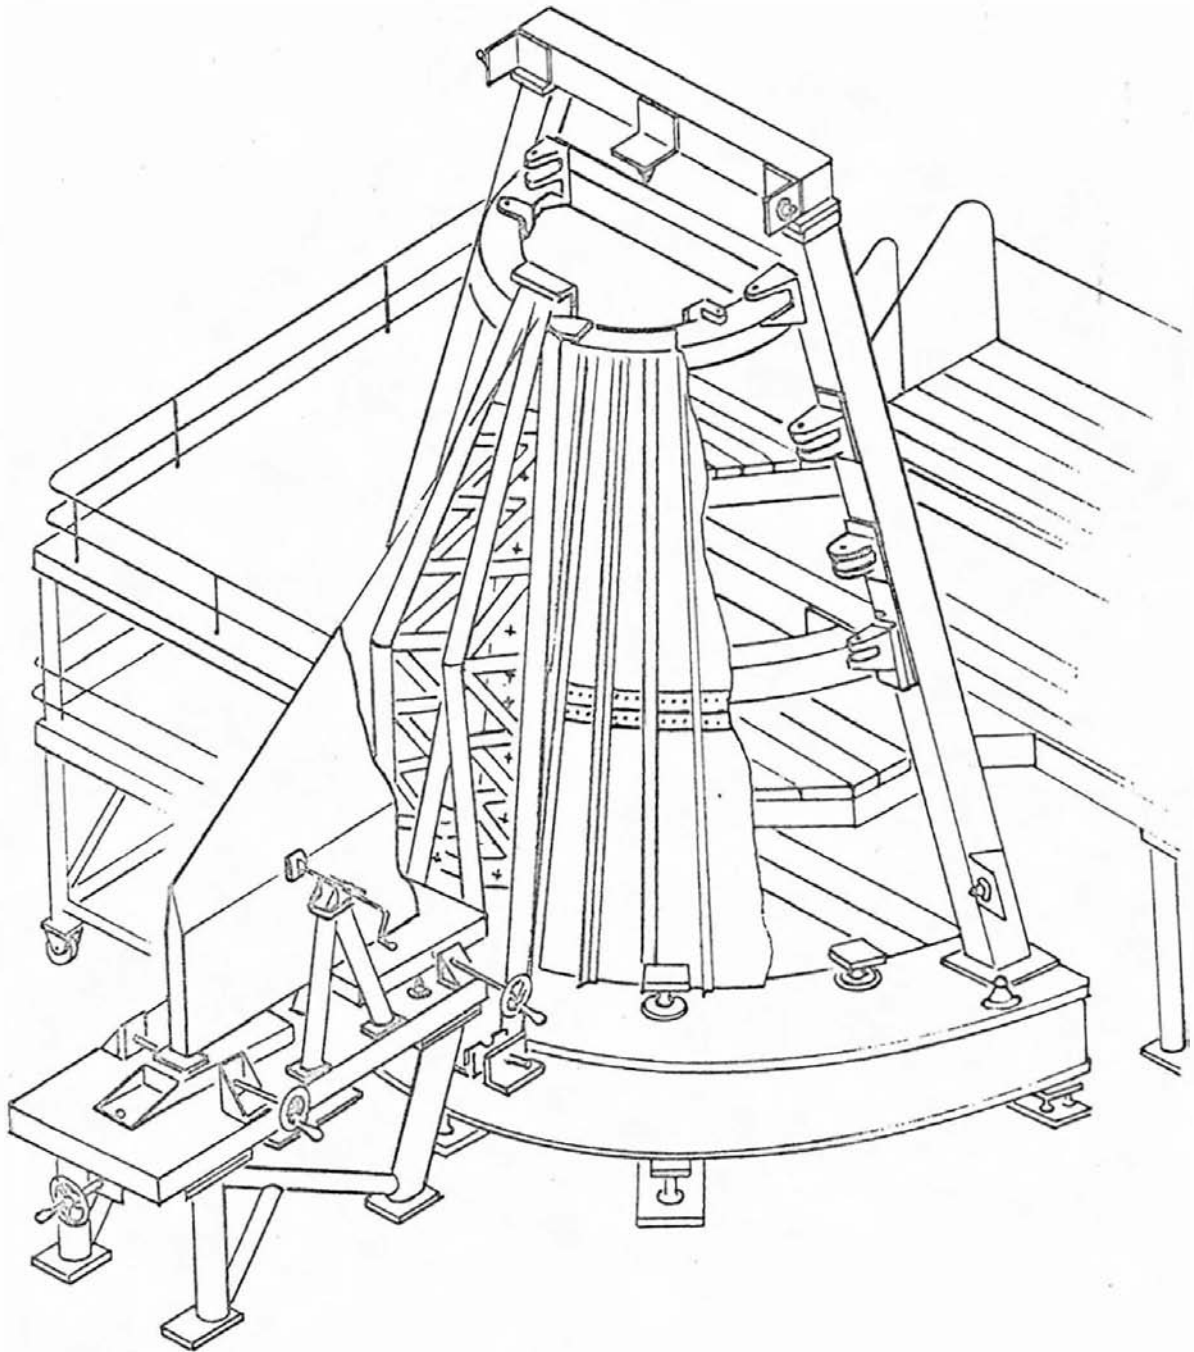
20. Lower Fairing Assembly and Fin Assembly Final Assembly
